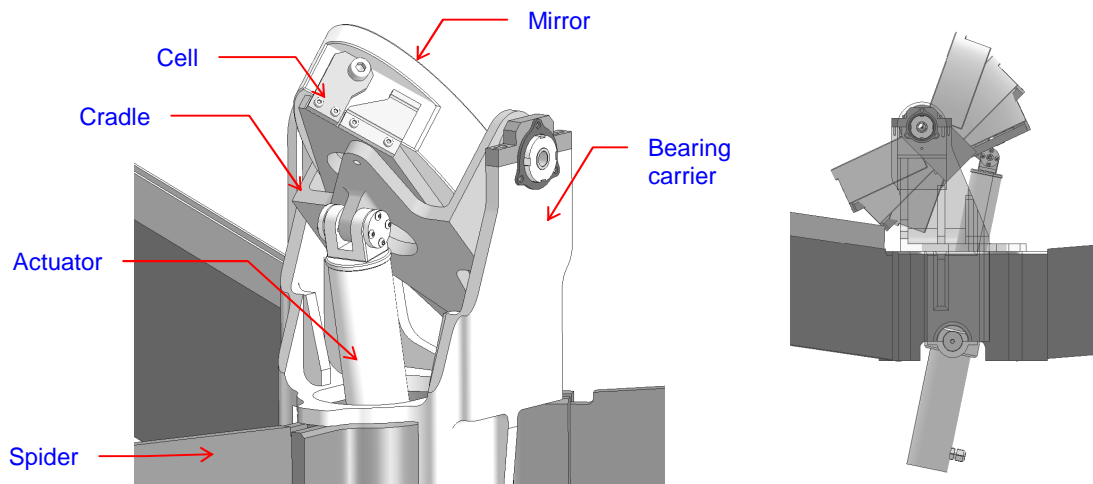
M3 mechanism and mirror. General view from the rear (left) and side view (right) with the mirror represented in the outmost and median position
